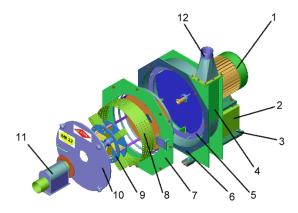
Horizontal Shaft Mill [21]: 1 – Electric Motor; 2 – Engine Support; 3 – Adjustable Buffer; 4 – Mill Housing; 5 – Ventilator; 6 – Lining; 7 – Sieve Housing; 8 – Sieve; 9 – Rotor with Hammers; 10 – Cap Mill; 11 – Aspiration Mill; 12 – Discharge Mill.
